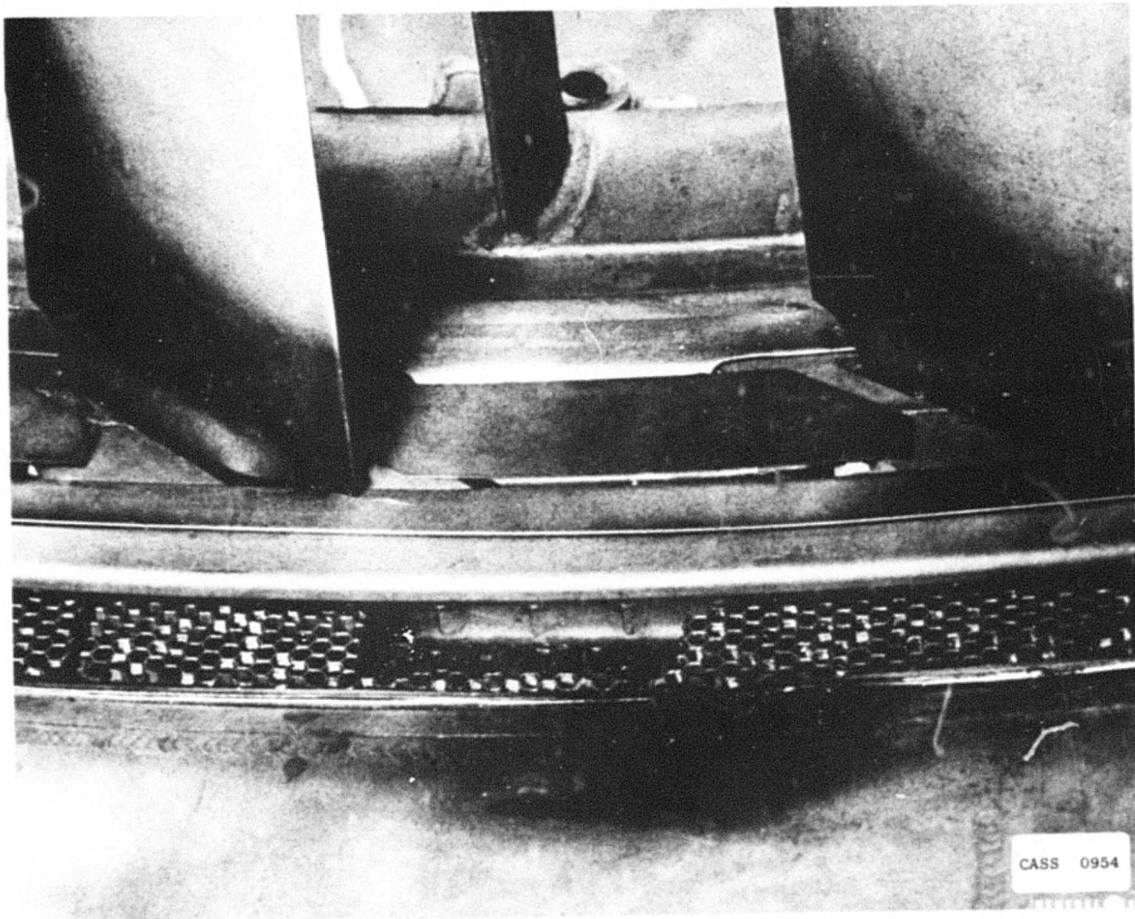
Recess in Forward Air Seal For Rotor Inspection
